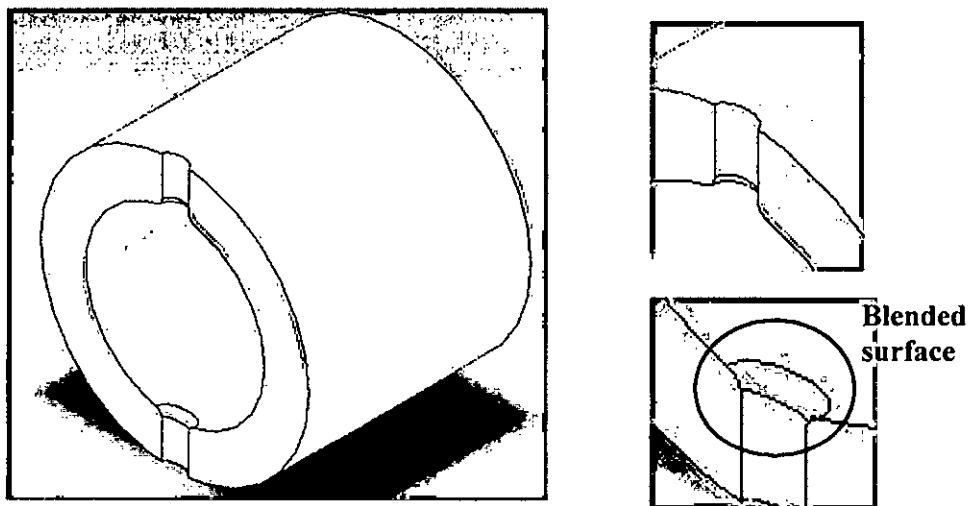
Radial elliptical cross holes having blended surface at the intersection.
